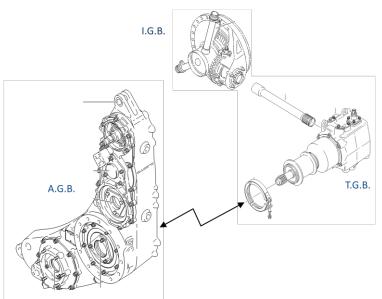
, Connection between the high-pressure shaft and the AGB^{xv}
